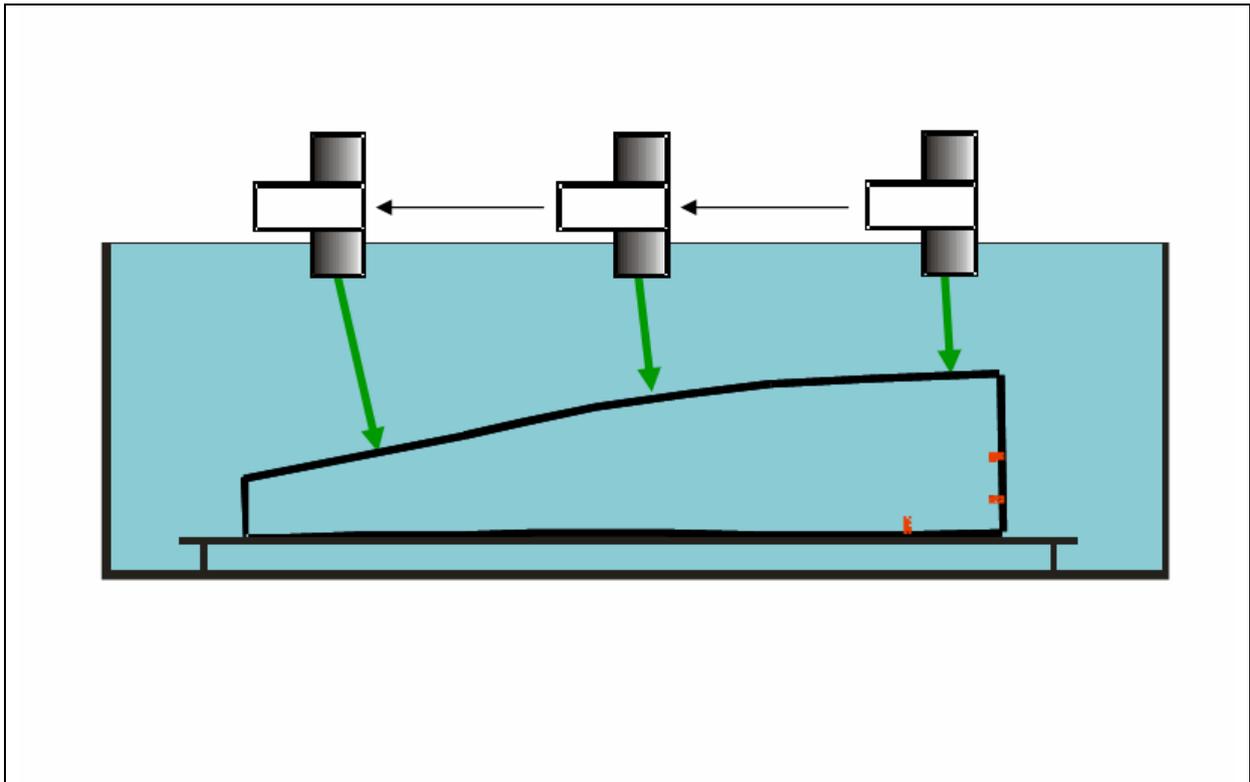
Exampe 1 - Immersion Technique Using Matrix Array Probe
